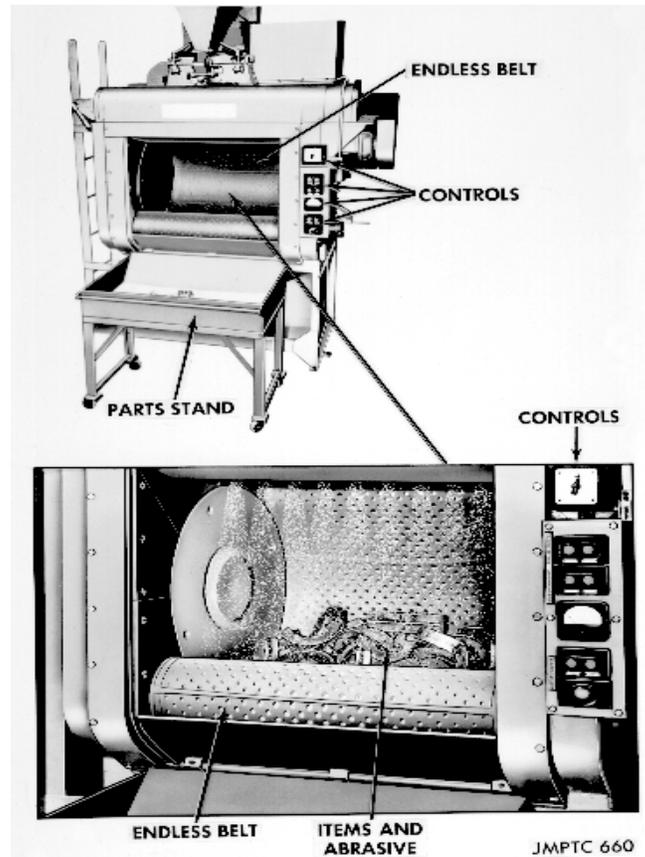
Tumbler-type abrasive blasting and cleaning machine.
